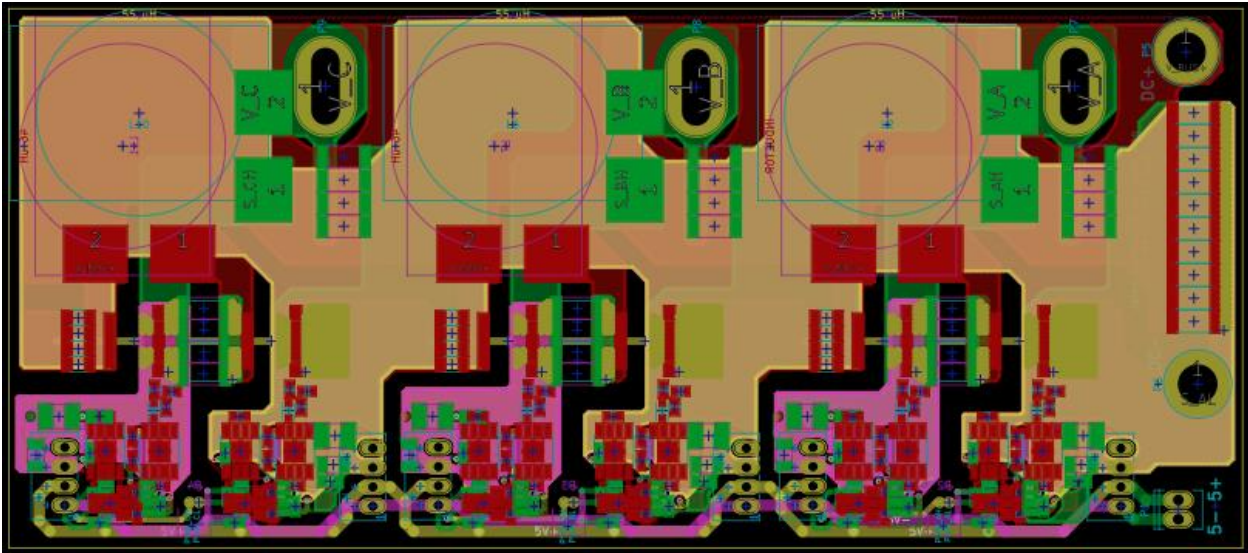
Inverter PCB Layout with All Layers Turned On
